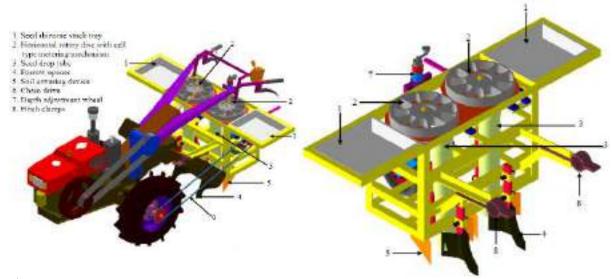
Three-dimensional drawing of 2-row power tiller operated ginger planter
